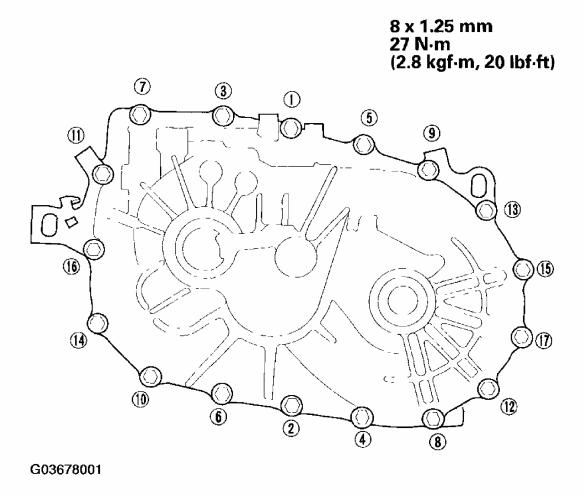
Identifying Tightening Sequence Of 8mm Flange Bolts Courtesy of AMERICAN HONDA MOTOR CO., INC.
